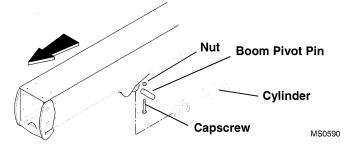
Install the hoist/lower cylinder and secure with the boom pivot pin, capscrew and nut.
